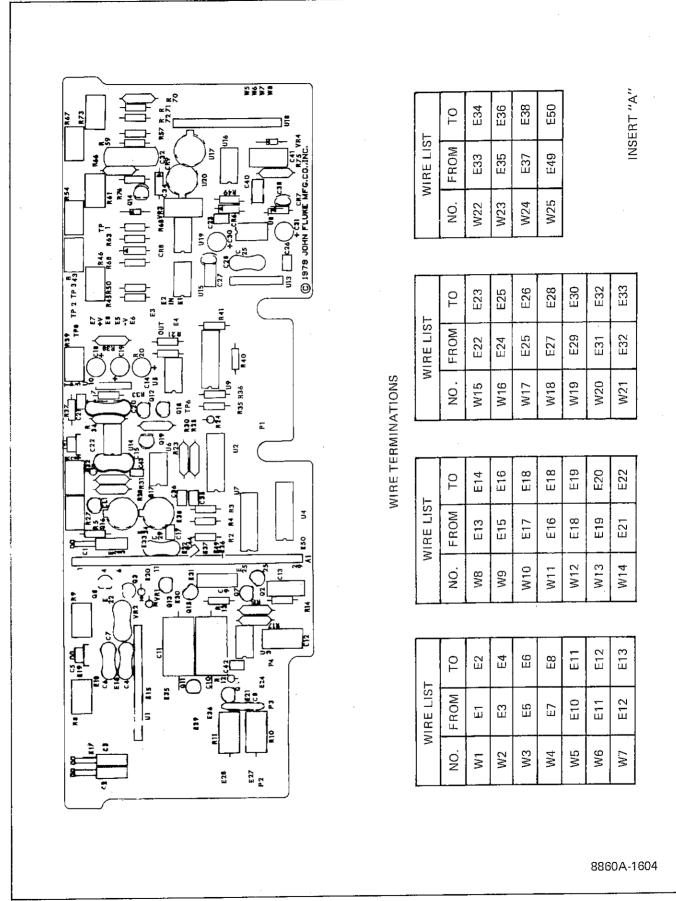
A4 AC/DC Scaling PCB Assembly
